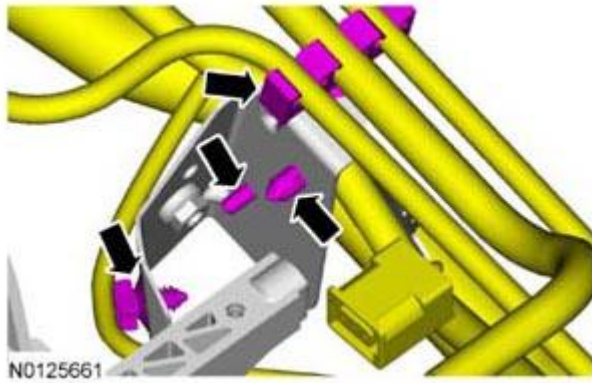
Locating Wiring Harness Retainers And Coolant Hose Retainer From Coolant Outlet Bracket
